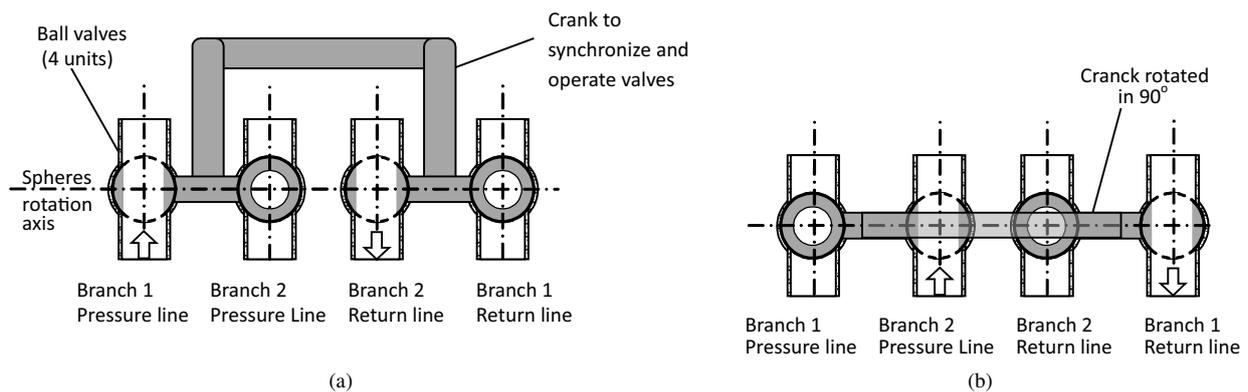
Top view sketch of four-way valve assembly, showing two operational positions (Lavezzo, 2010):
